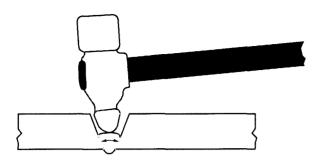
Peening the Middle Weld Layer Distributes and Balances Distortion
